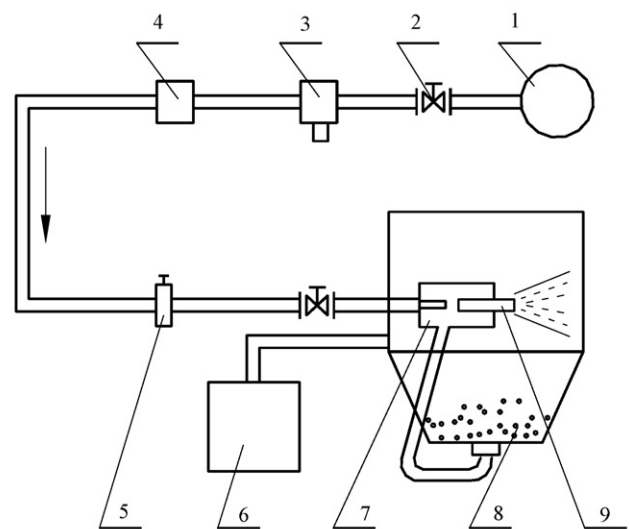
Schematic diagram of the sand blasting machine tool (1: air compressor, 2: control valve, 3: filter, 4: desiccator, 5: press adjusting valve, 6: dust catcher, 7: blasting gun, 8: abrasive hopper, 9: ceramic nozzle).
